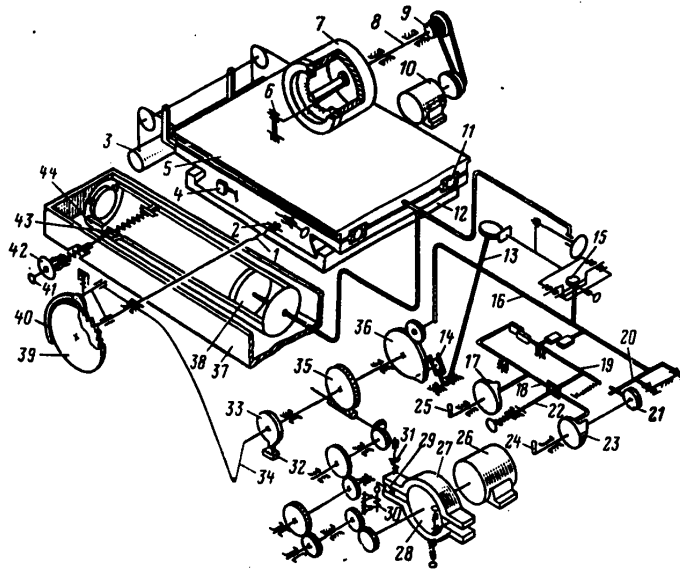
Mechanical Diagram of Diamond-Type Cutting Machine
